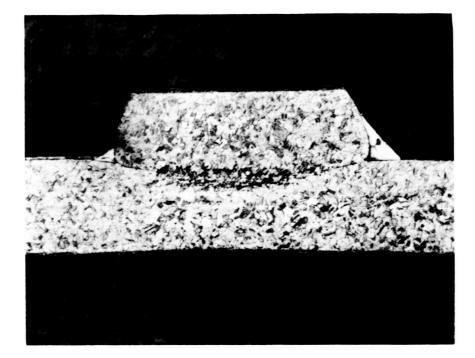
Weld joint 2.83; gold plated Kovar foil to itself; not sterilized; 150x magnification; Carapella etch (02340).
